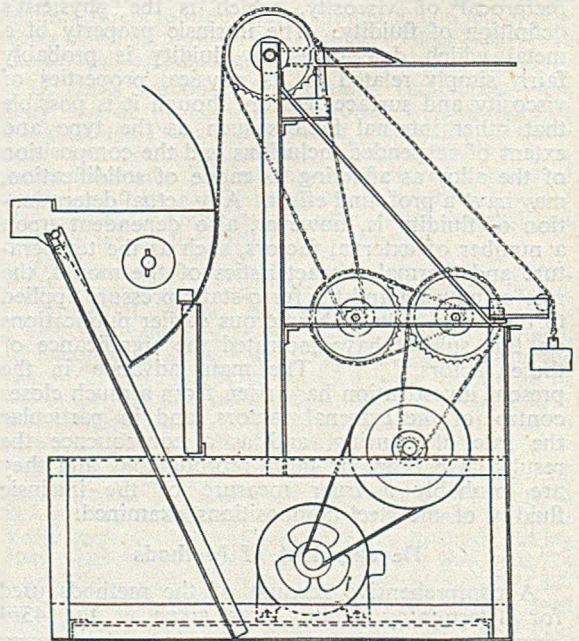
Carriage and Mechanism for Operating the Constant-speed Pouring Ladle.
